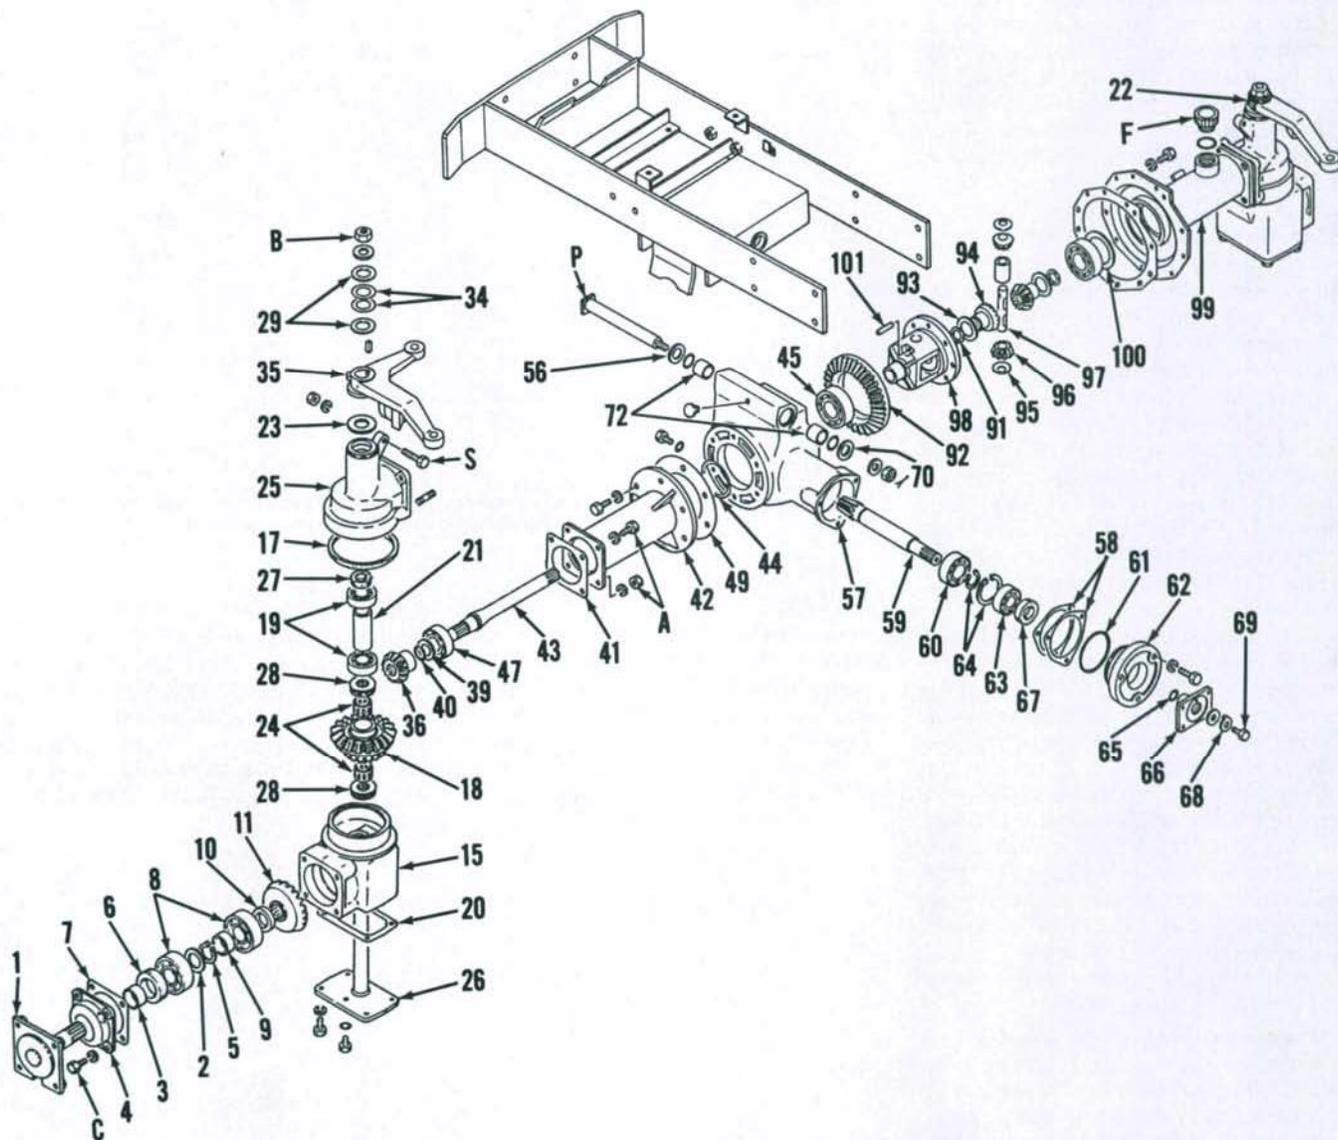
Exploded view of the complete axle housing used on late YM135D and YM155D models. Early models are similar.
